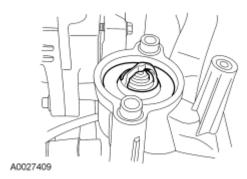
Coolant Outlet Adapter & Bolts Courtesy of FORD MOTOR CO.
